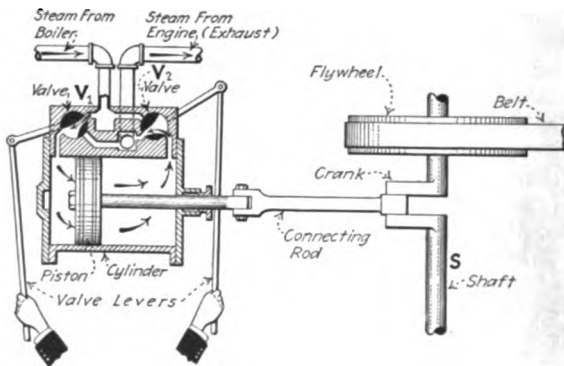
Section through cylinder of engine with hand-operated valves. (This is the same engine as shown in Fig. 3 but with the valves so shifted as to cause the piston to move in the opposite direction.)
